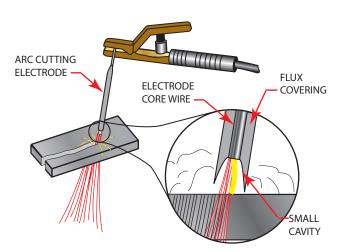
The small cavity at the end of the electrode creates enough jetting action to blow the molten metal formed by the arc away to form a cut.
